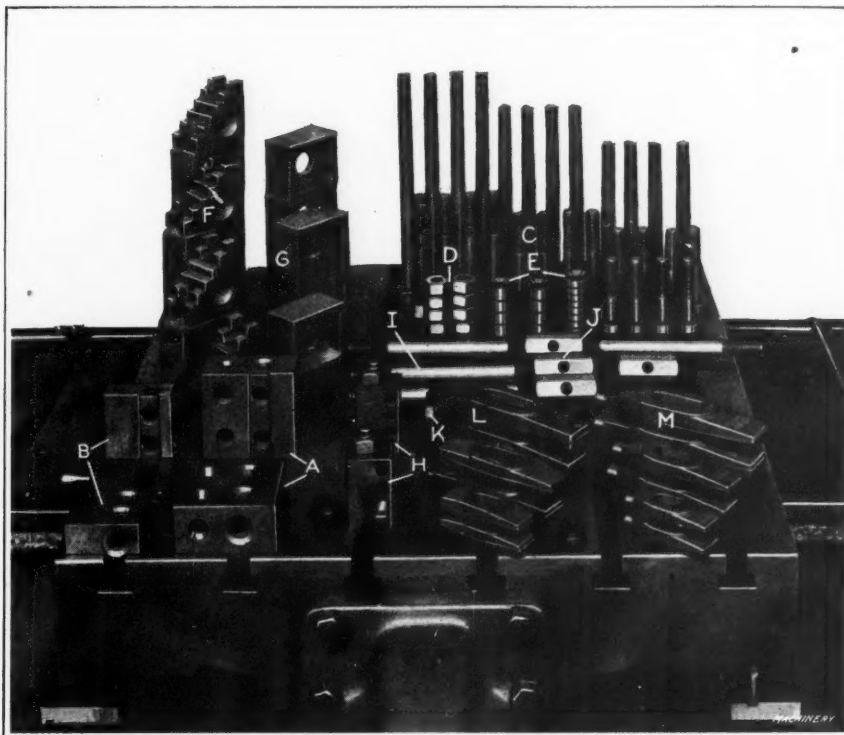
Lucas Interchangeable Locating and Clamping Accessories for Machine Tools designed on Unit Principle
